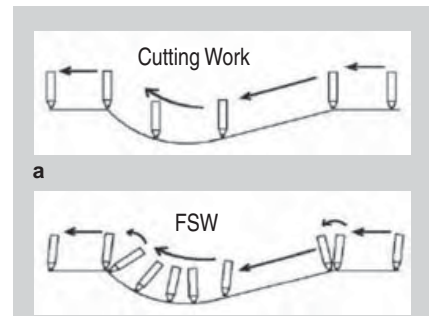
Position of tools used in (a) working machine and (b) FSW machine.
